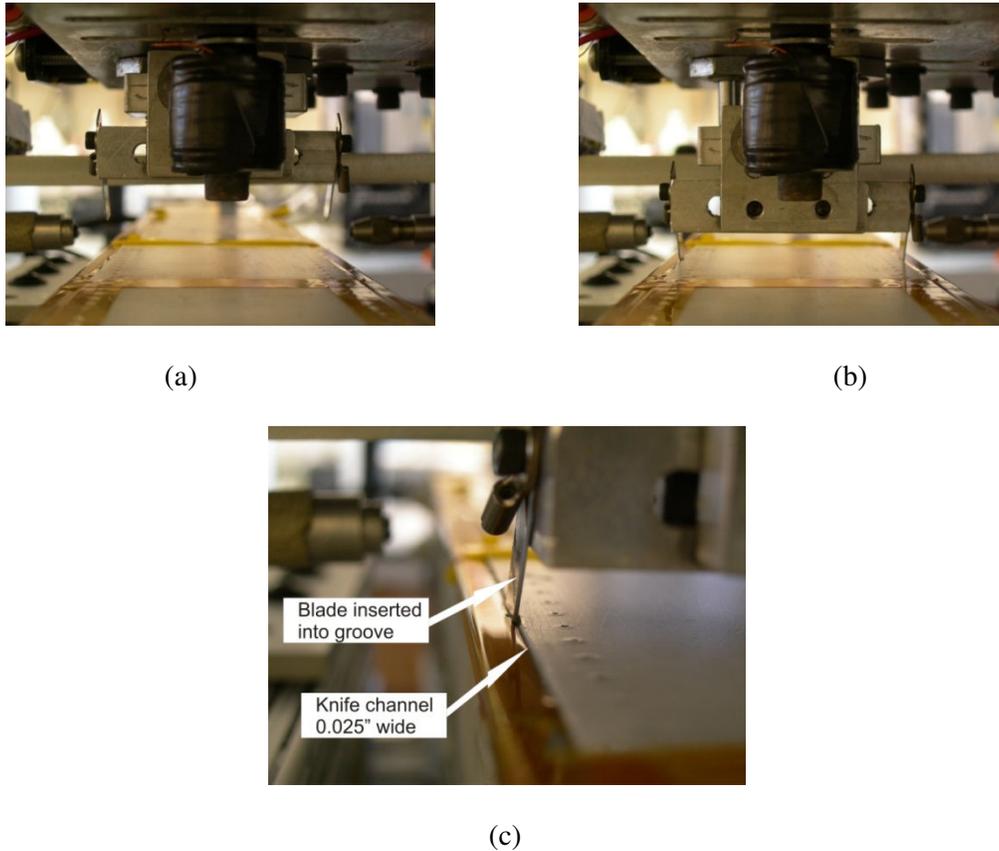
(a) Knife Assembly Disengaged (b) Knife Assembly Engaged (c) Close Up Of Knife Assembly in Paddle Groove
